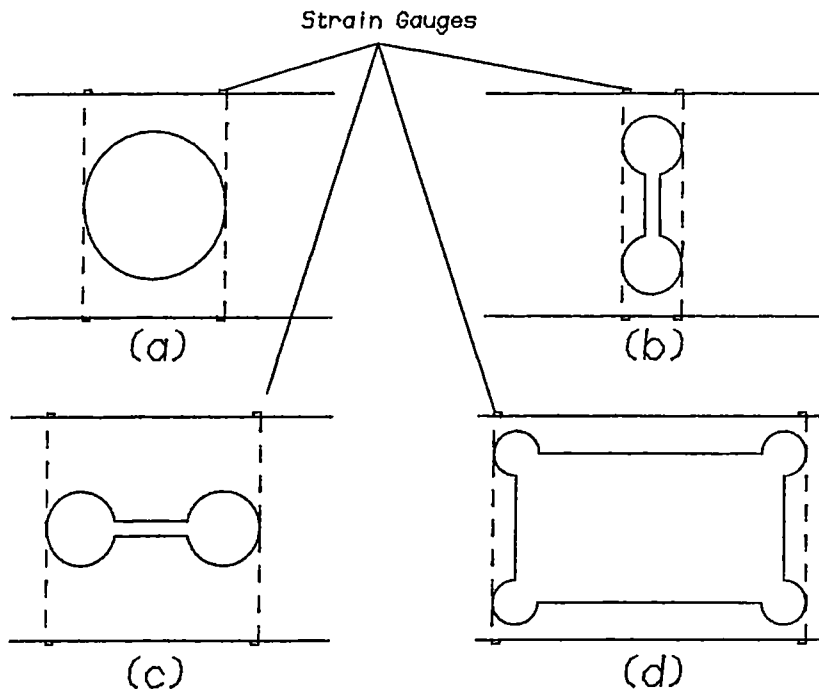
Various Types of One Component Dynamometer with Circular Hole [93]
